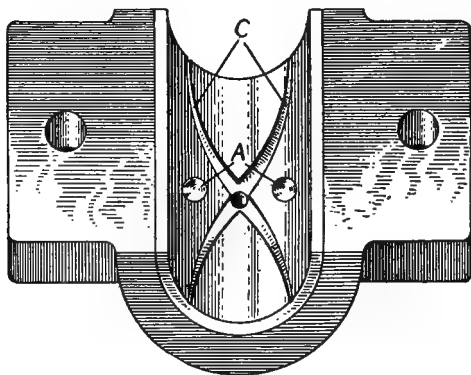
Typical Engine Bearing, Showing Oil Grooves C and Retaining Plugs A.
